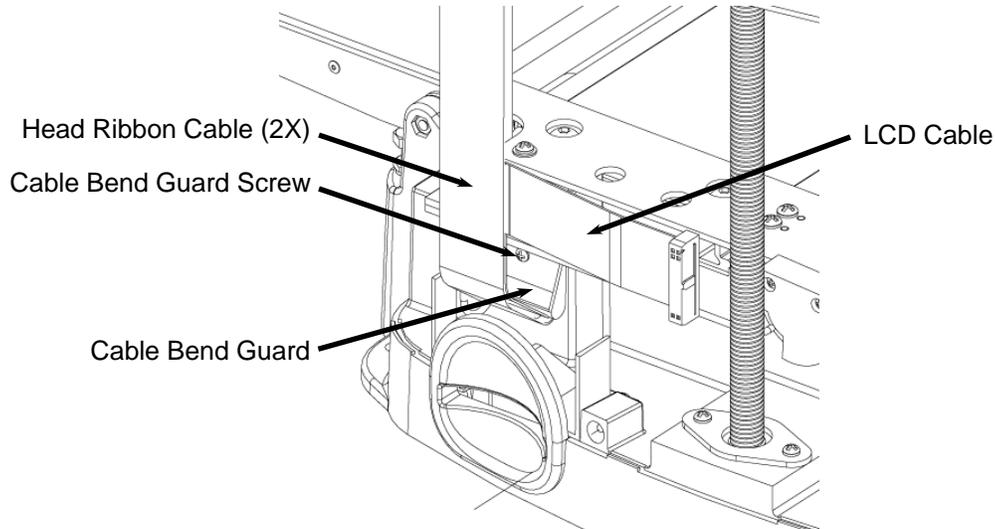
REMOVING THE RIBBON CABLE GUARD
